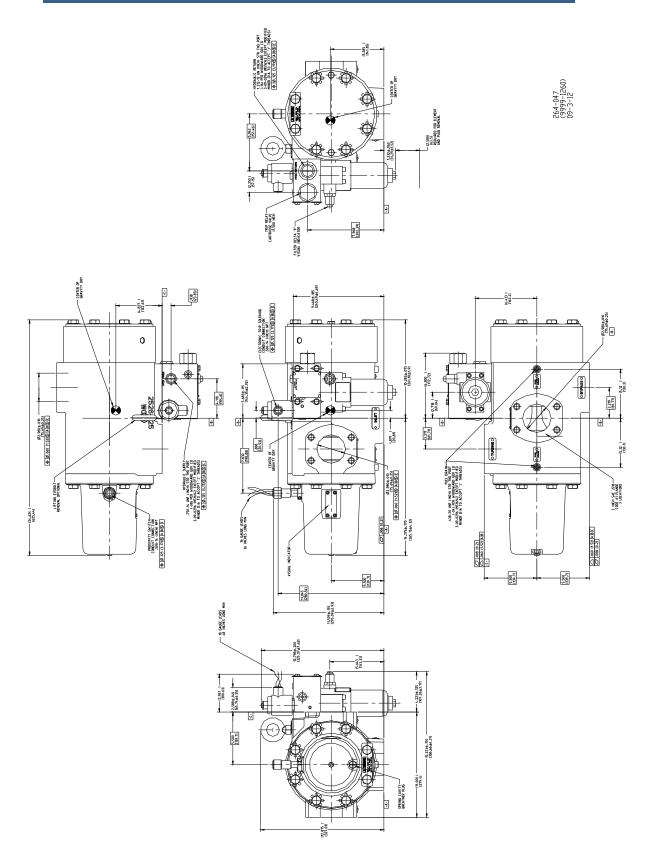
Outline Drawing—Electric Trip Stop Valve (9904-1353)
